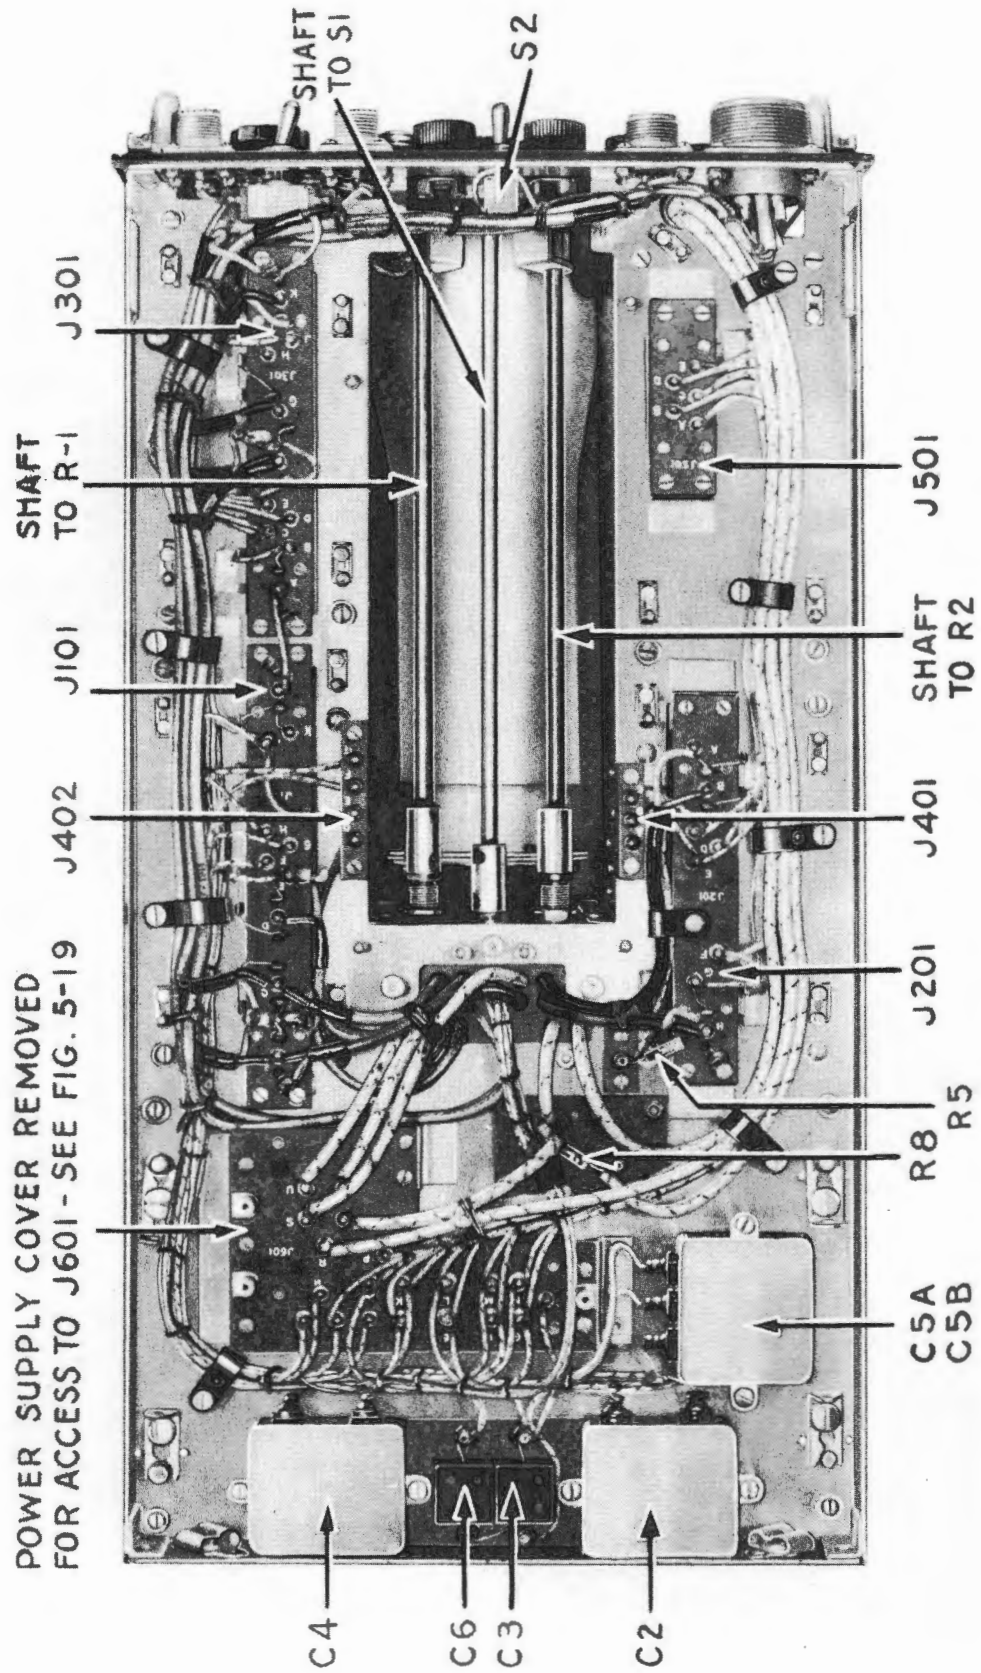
Bottom View of Chassis—Saw-tooth Oscillator Removed
